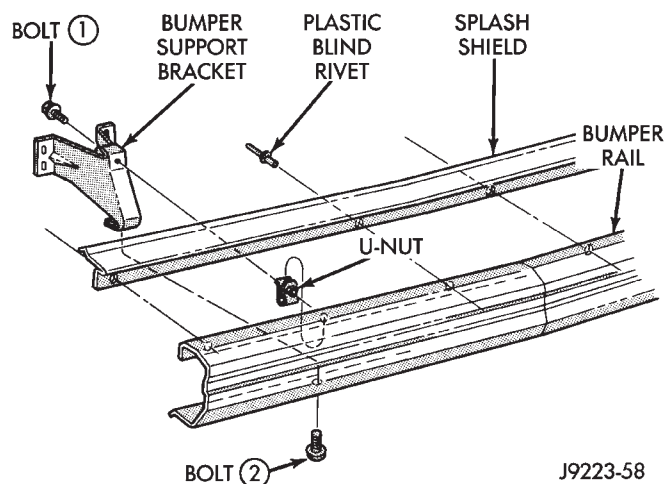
Bumper Bracket & Splash Shield Removal/Installation—XJ Vehicles
